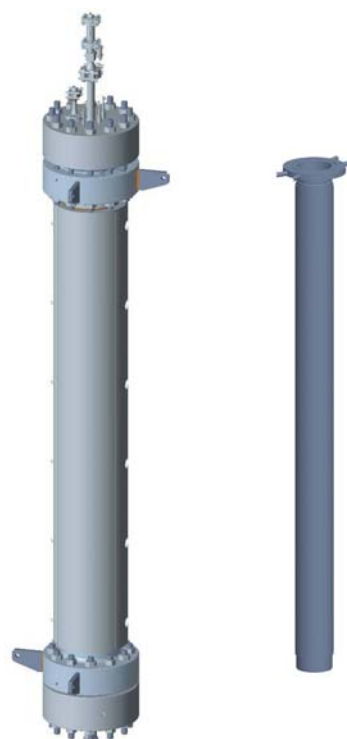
GA Down-Flow, Solid-Wall Reactor and Removable Liner Assembly
